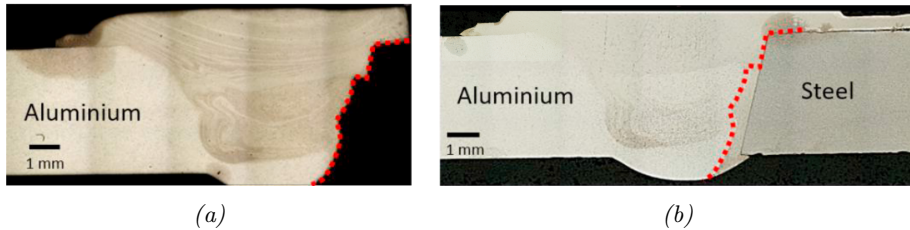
The fracture path in (a) the broken tensile specimen and (b) its location in the EZ in the first produced Al-fe HYB butt weld. Copied from [13].
